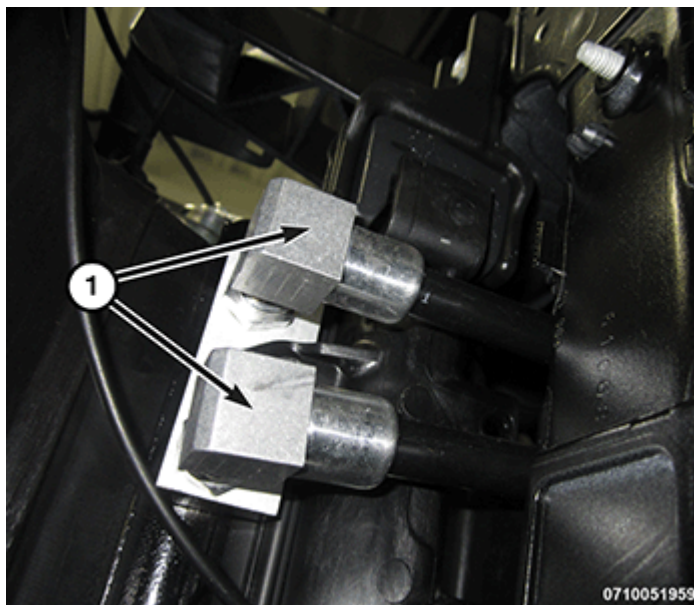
Transmission Cooler Lines From Transmission Cooler
